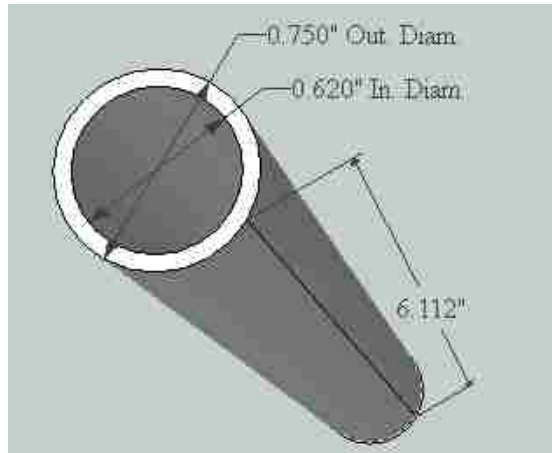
Lower aluminum spacer tubes which connect the lower and middle trimmers. There are four lower aluminum spacer tubes per applicator.
